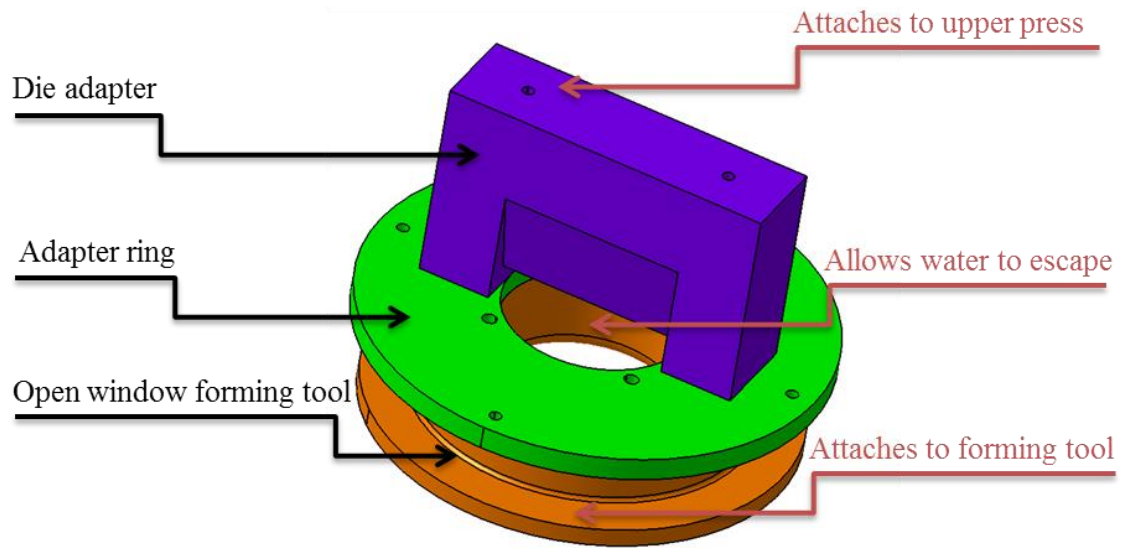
The die adapter and adapter ring custom manufactured forming tools attached to the pre-existing open window forming tool.
